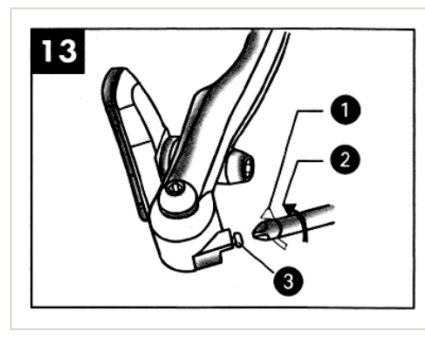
1 less tension · 2 more tension · 3 spring adjusting screw
